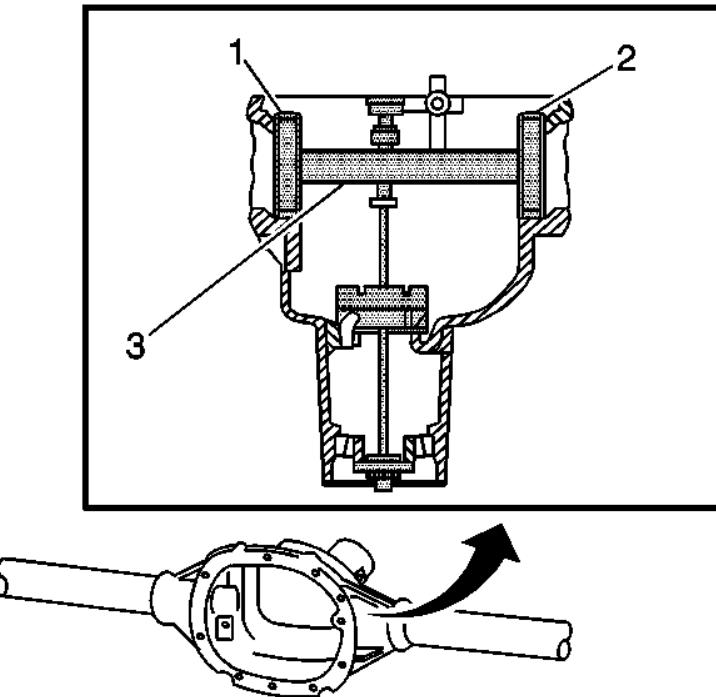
Assembling Special Tools In Differential Carrier Bore
